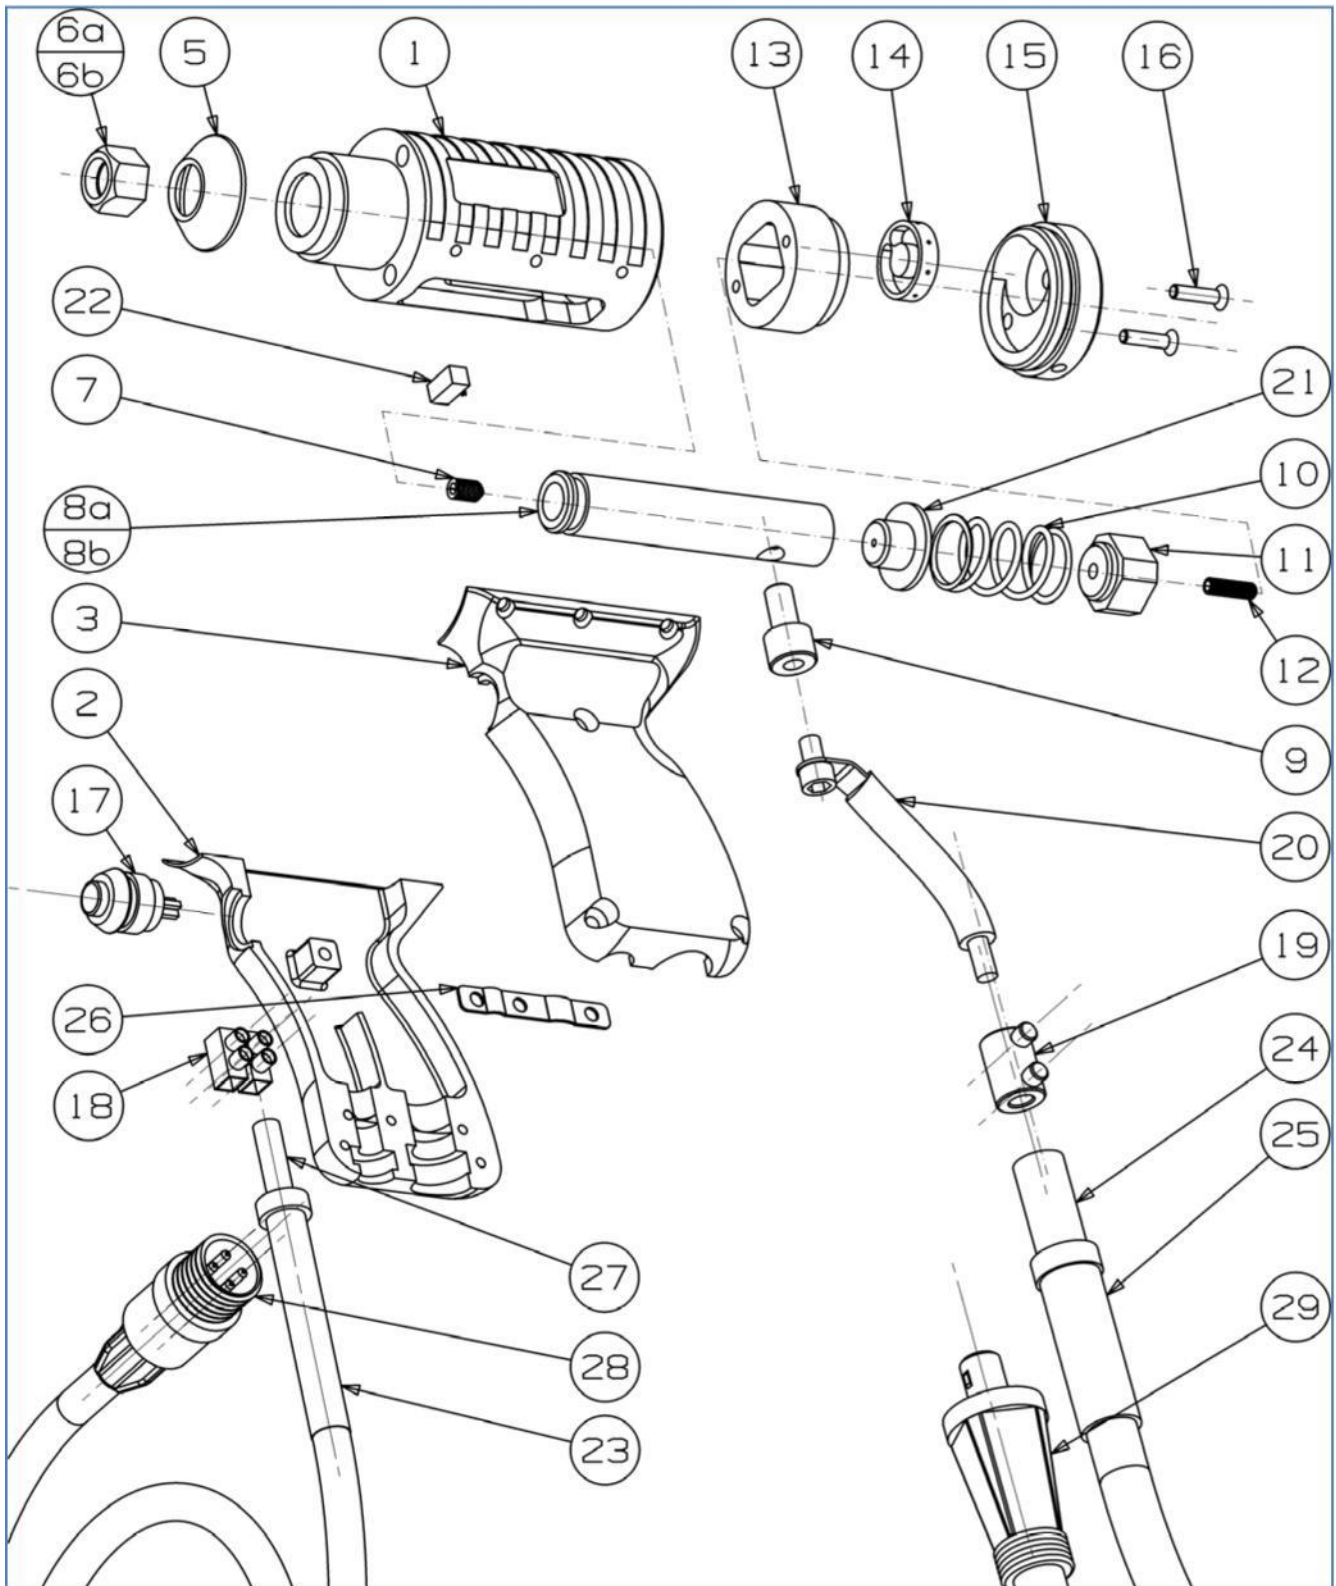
Detailed view of the ESP 1 ISO welding gun (welding of cup head pins)
